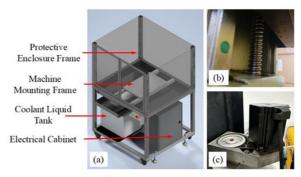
Mechanical system after improvement; a) Milling machine protective frame; b) Ball screw transmission; c) Stepper motor
